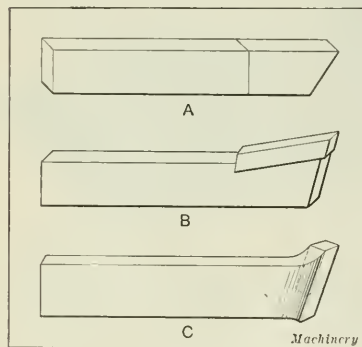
A, Butt-welded Tool; B and C, Arc-welded Tools
